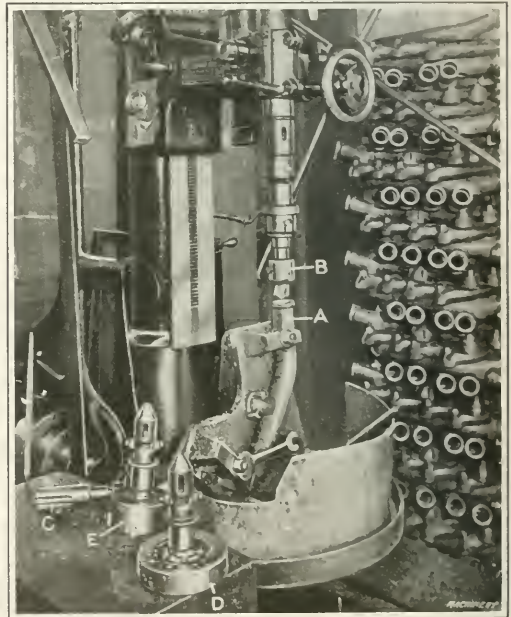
"Aurora" 28-inch Upright Drill equipped with "Wizard" Quick-change Chuck and Tools for drilling, countersinking, hollow-milling and threading End of Exhaust Manifolds
